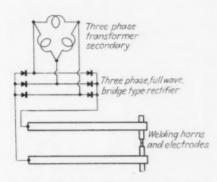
Schematic diagram of the power circuit of a typical d.c. welding set-up, using a three-phase dry disk type of rectifier on the secondary: side of the welding transformer.
